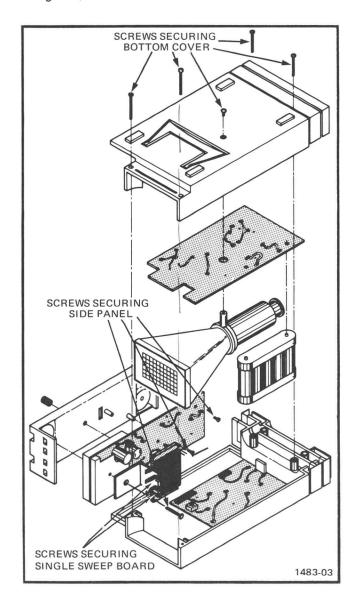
Location of screws for disassembly. (Instrument shown upside down.)
